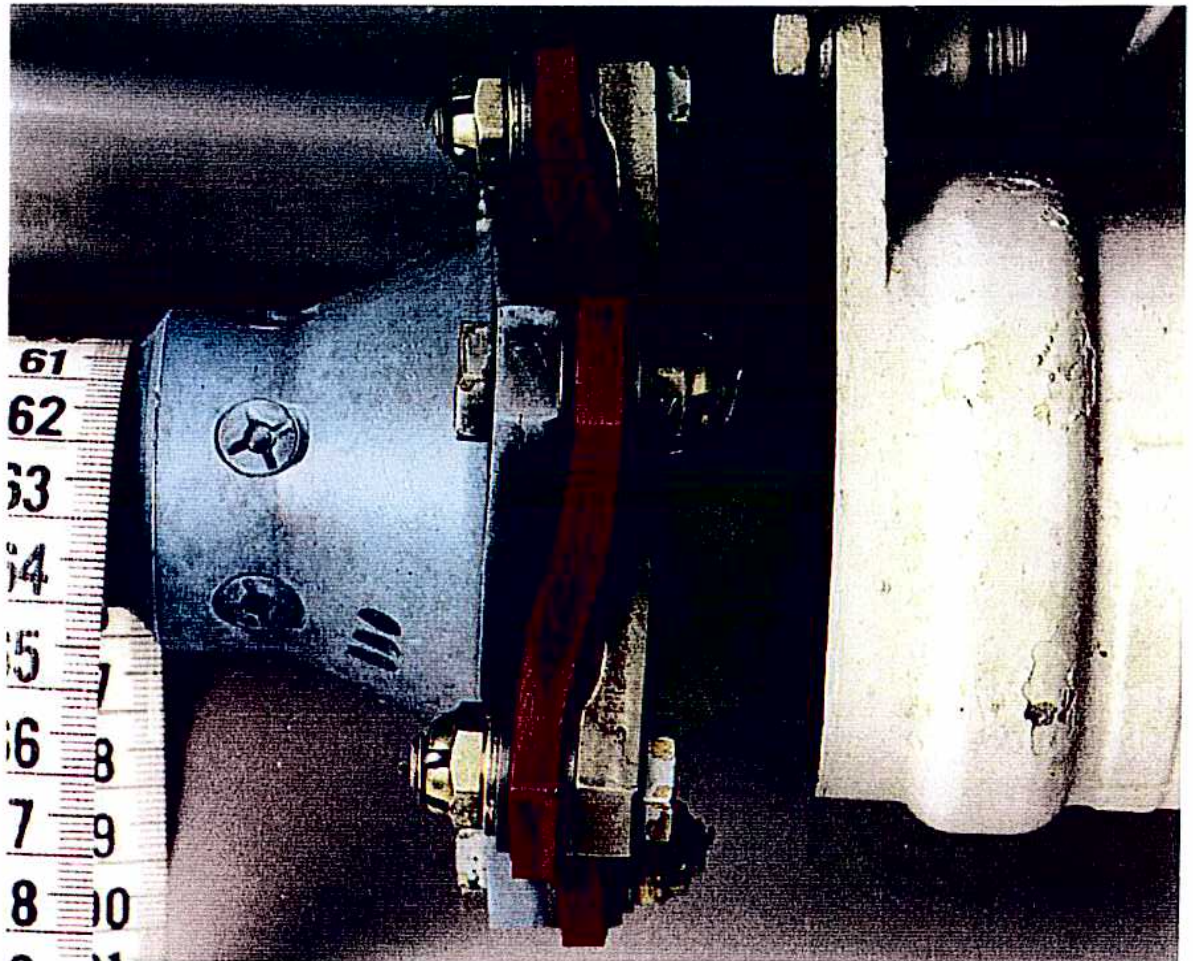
Side (profile) view of the large dia. bushed flexible coupling (dark red colour), flange connecting the rear TR drive shaft to TGB. A significant backwards deformation of the coupling lugs connected to the drive shaft is noted (maximum axial displacement ~7 mm).
